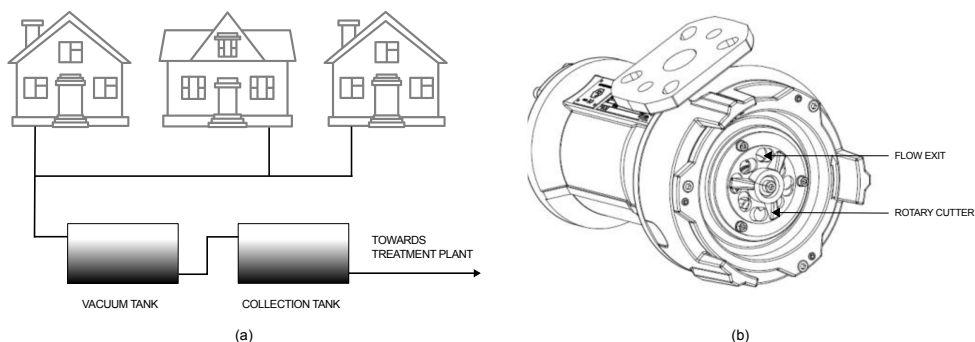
a) Schematic drawing of a vacuum collection station. b) Cutter pump (submersible dis-integrator pump manufactured by Landustrie).
